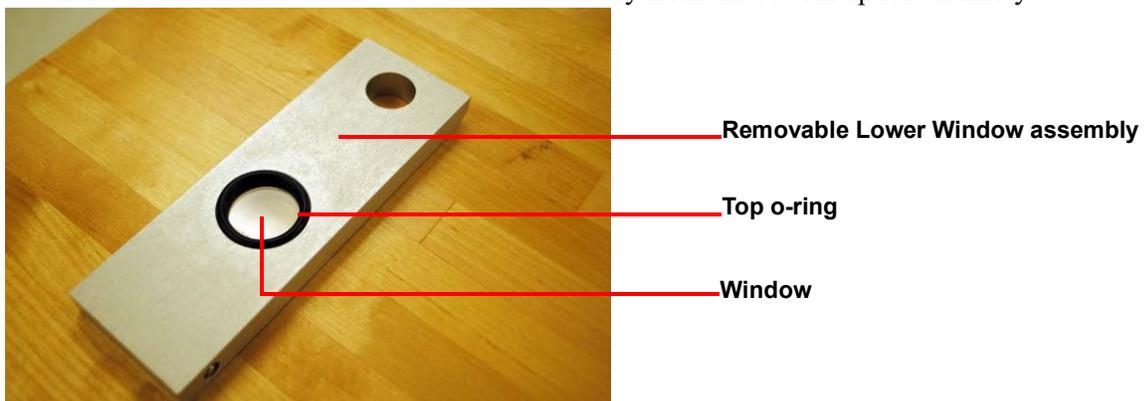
Removable Lower Window assembly removed from bottom optics assembly.
